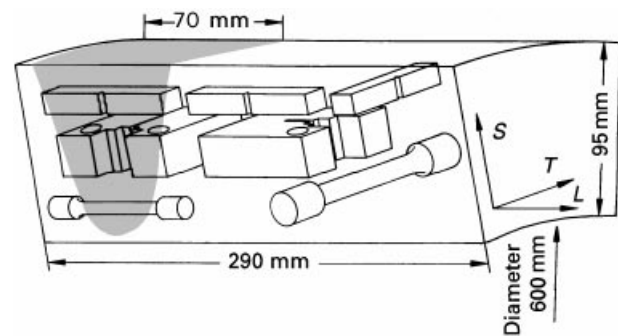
Position of the specimens for the determination of mechanical characteristics as well as of fracture mechanics data for the X 20 CrMoV 12 1 base materials and the aged similar weld metal of the circumferential seam.
